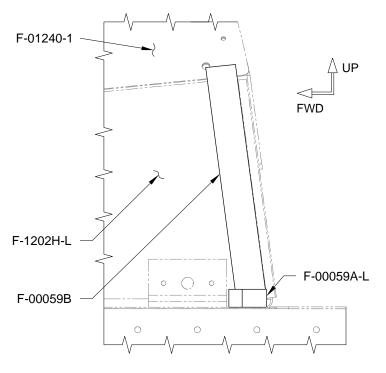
LEFT SIDE VIEW (SEAL SHOWN TRIMMED TO LENGTH)
